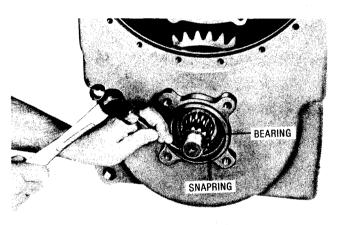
Installing rear output shaft snapring (-1 models with two-piece or rear output shaft)
